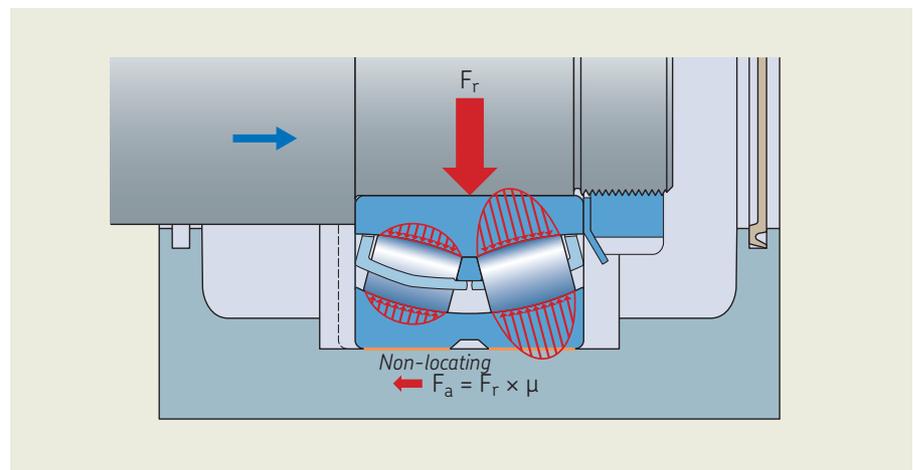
Axial load generation to spherical roller bearing in an axially free bearing.
